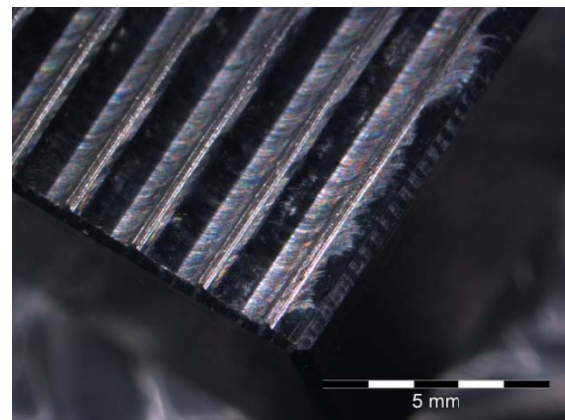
Stereo micrographic image of steel embossing tool, provided by BPE
